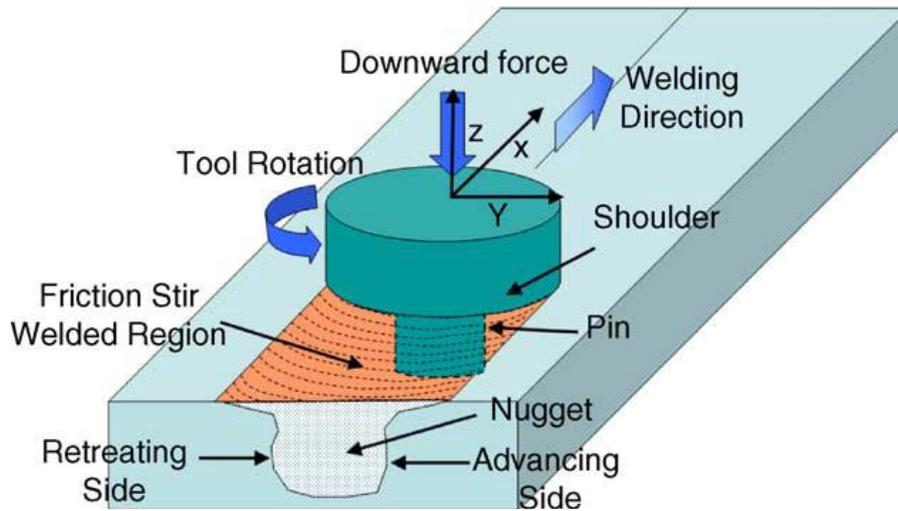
Principle mechanism of friction stir welding [1].
